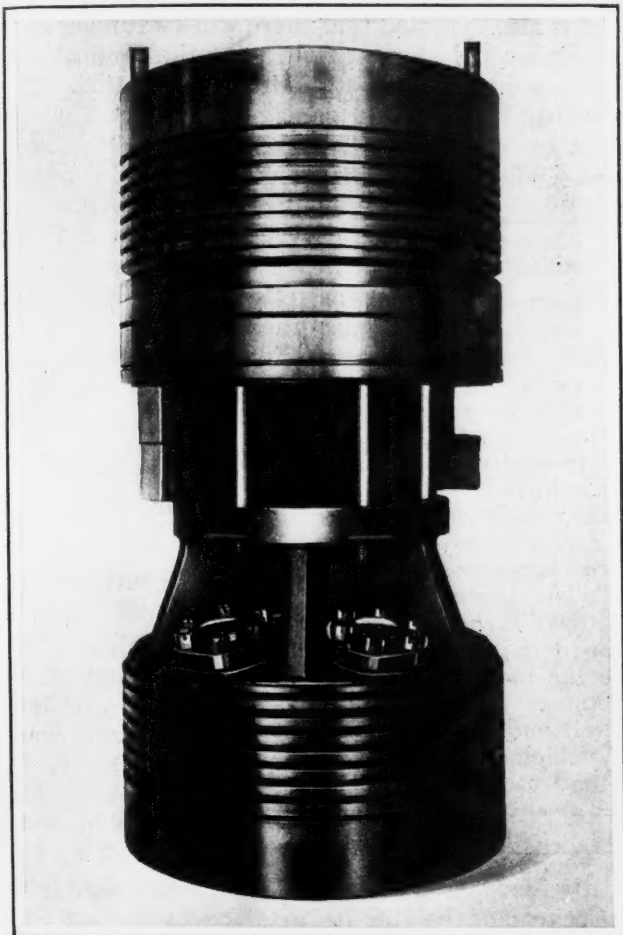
Piston of Double-acting Design which Takes a Combustion Load of 300,000 Pounds
